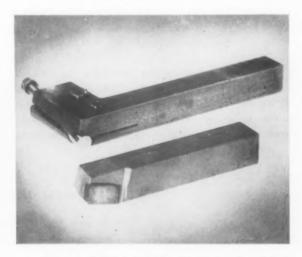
Typical brazed tip tool and solid insert tool used for general production.
